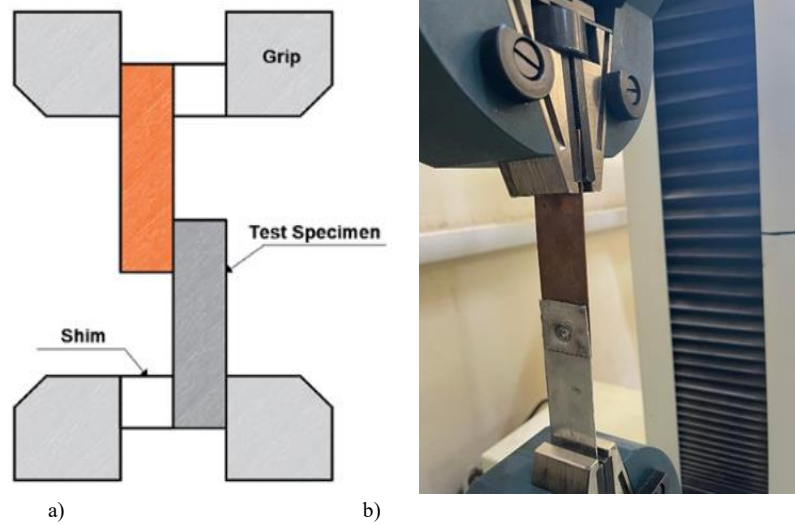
Tensile shear test; a) specimens with alignments tab, b) specimens gripped
